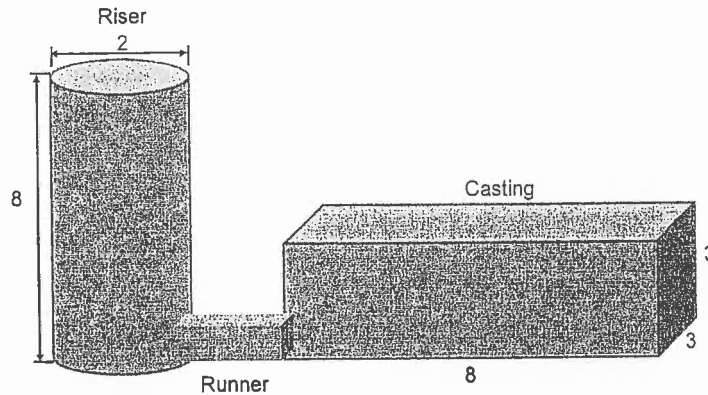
Schematic of a casting set-up showing the riser, runner and casting mould as well as the dimensions. Note: All dimensions are in cm
